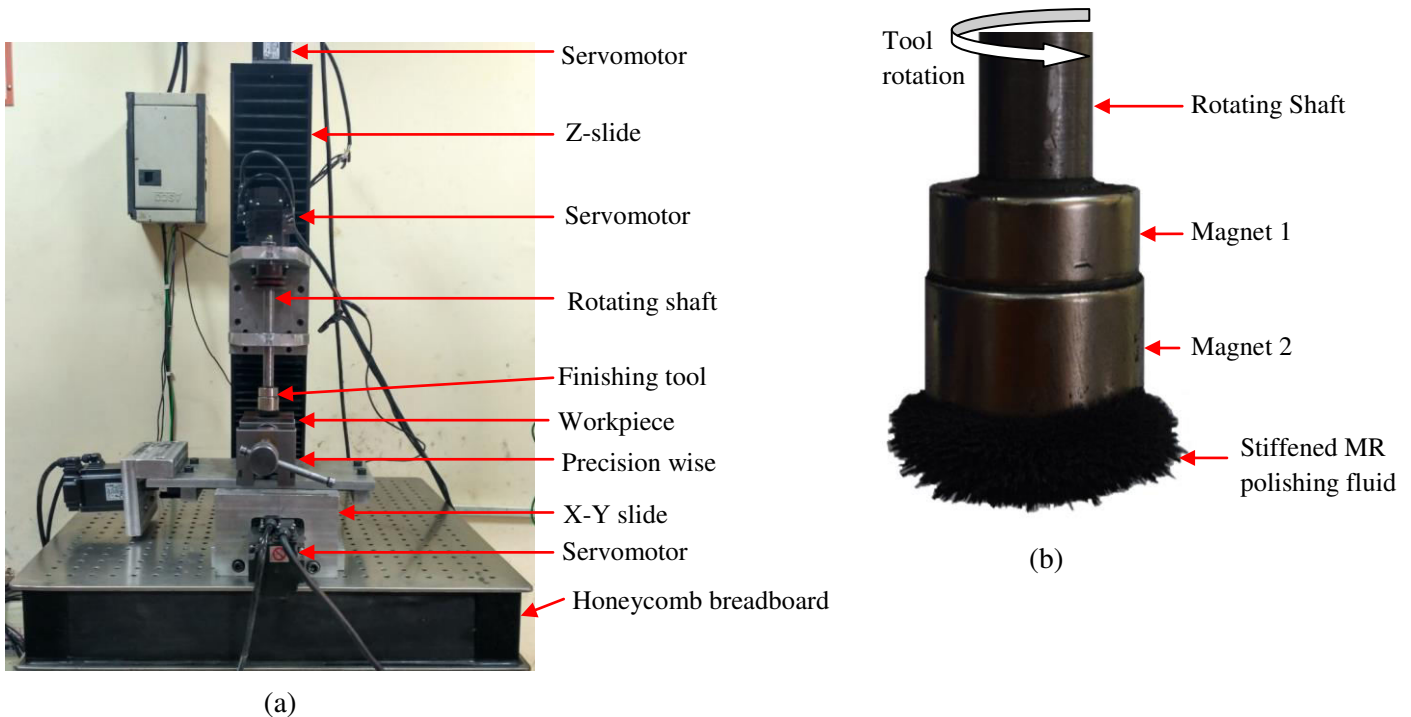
(a) Experimental setup of the magnetorheological finishing tool (b) Enlarged view of the magnetorheological finishing tool with stiffened MR polishing fluid.
